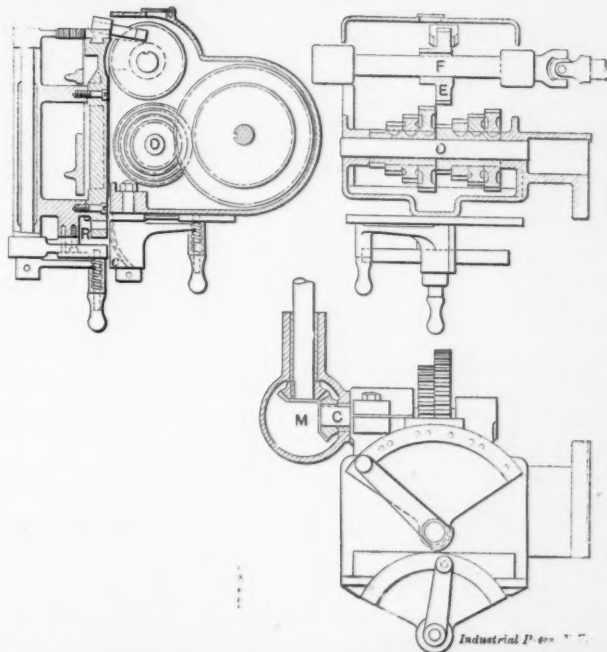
SECTIONAL VIEWS OF LOWER EIGHT-SPEED MECHANISM.
